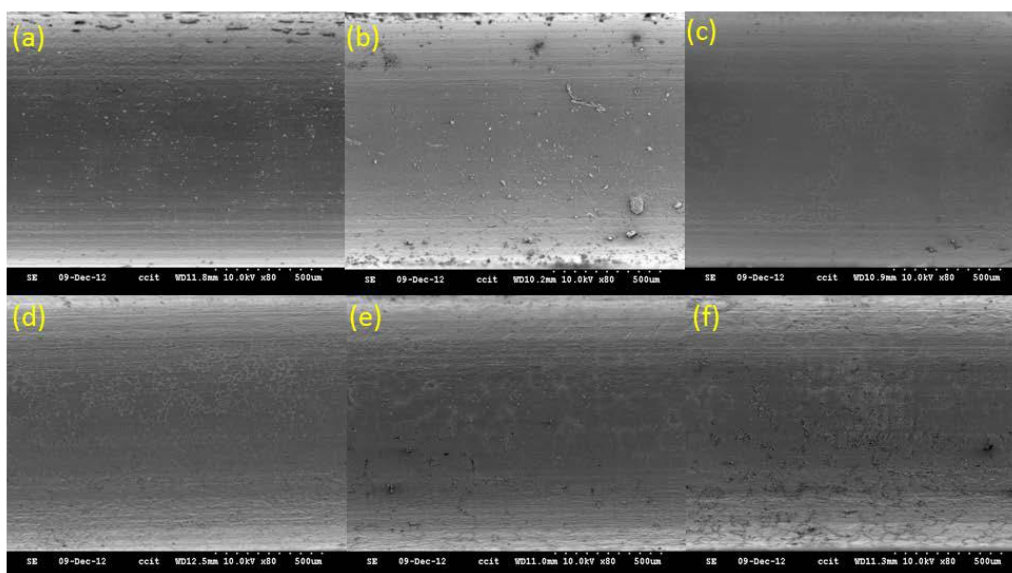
Morphologies of pack cementation finished specimen at channel under different feed rate of (a) 50 mm/min; (b) 75 mm/min; (c) 100 mm/min; (d) 125 mm/min; (e) 150 mm/min; (f) 175 mm/min.
